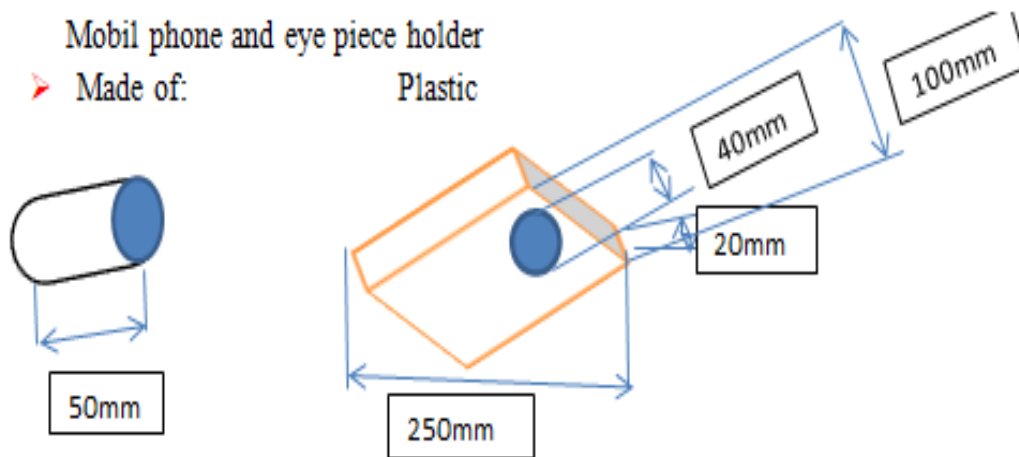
Eye piece Holder & Mobile camera Attachment/Holder
